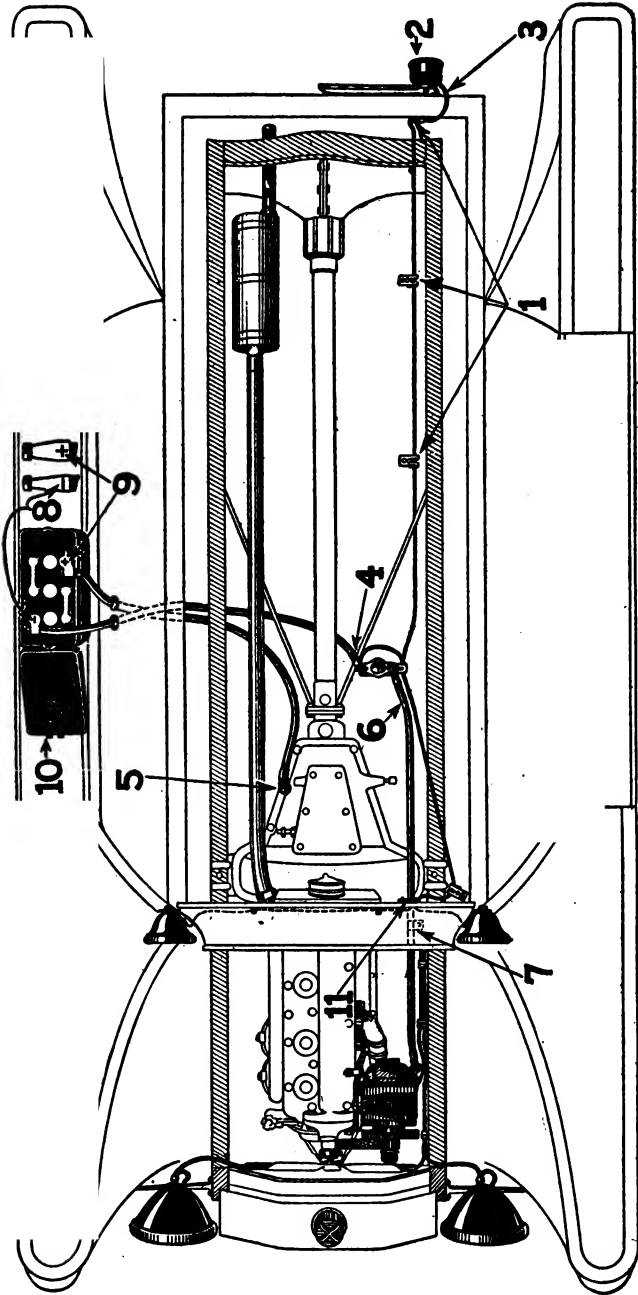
Plan View of Complete Wiring System for Gray & Davis Ford Installation
